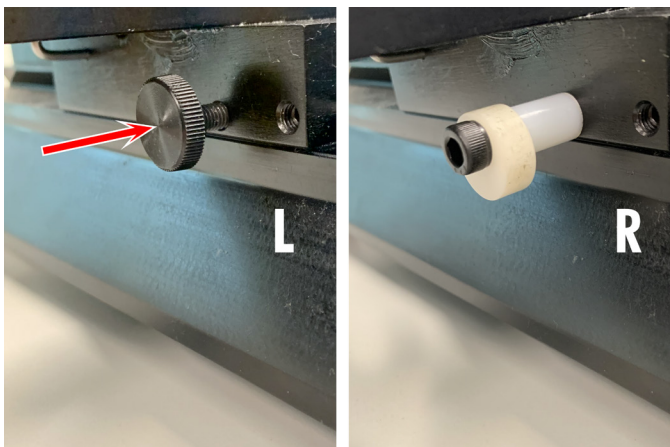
Left: On a standard leadscrew machine, you will remove the Y-axis locking screw; Right: Then install the eccentric trigger where the Y-axis locking screw was.
